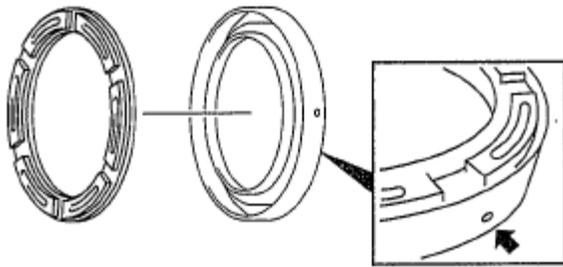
B2, B4 Brake And F3 One-Way Clutch Component Disassembled View
